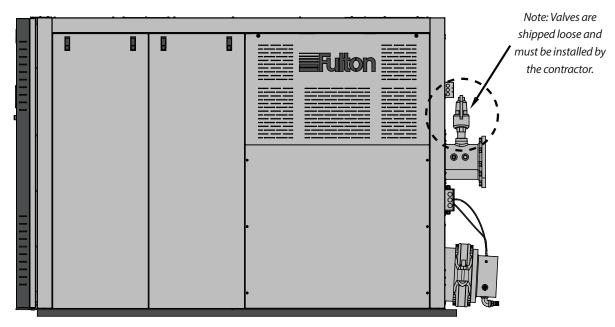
SAFETY VALVE INSTALLATION LOCATION
